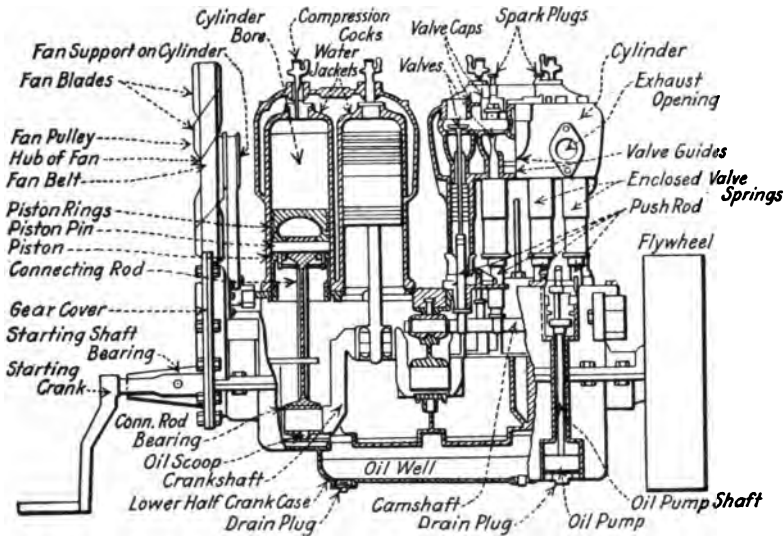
Sectional view of typical four-stroke cycle, four-cylinder motor truck engine, showing important internal parts and their relation to each other.
